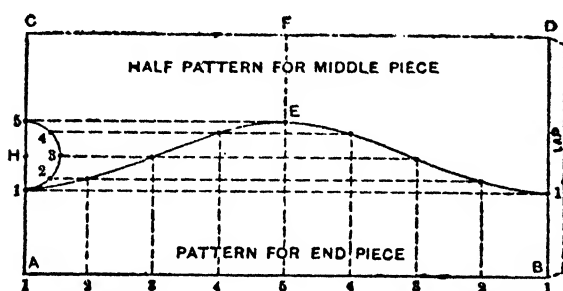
Pattern for Three-Piece 90-Degree Elbow
